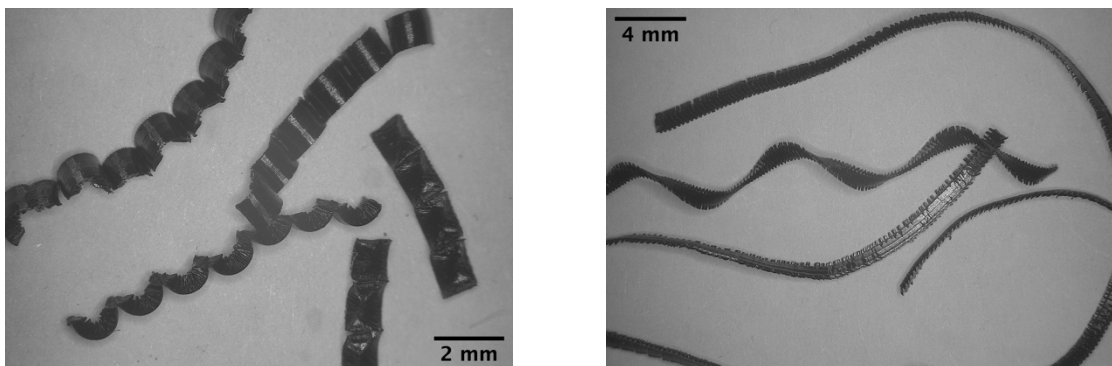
Chips produced under flood-cooled conditions with a new tool (left) and a worn tool (right)
